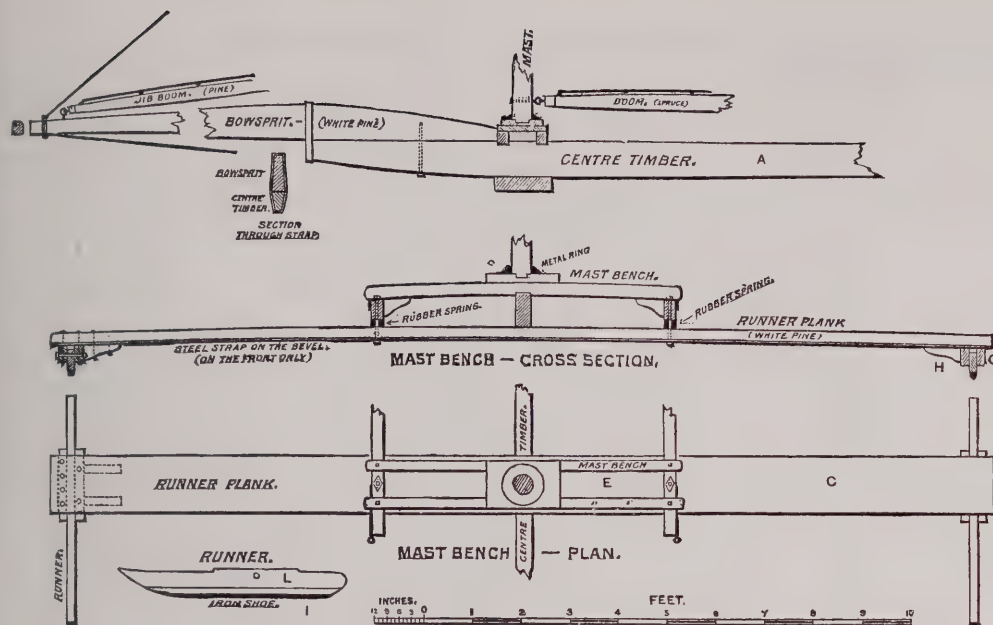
PLAN AND ELEVATION OF MAST-BENCH AND RUNNER-PLANK.
